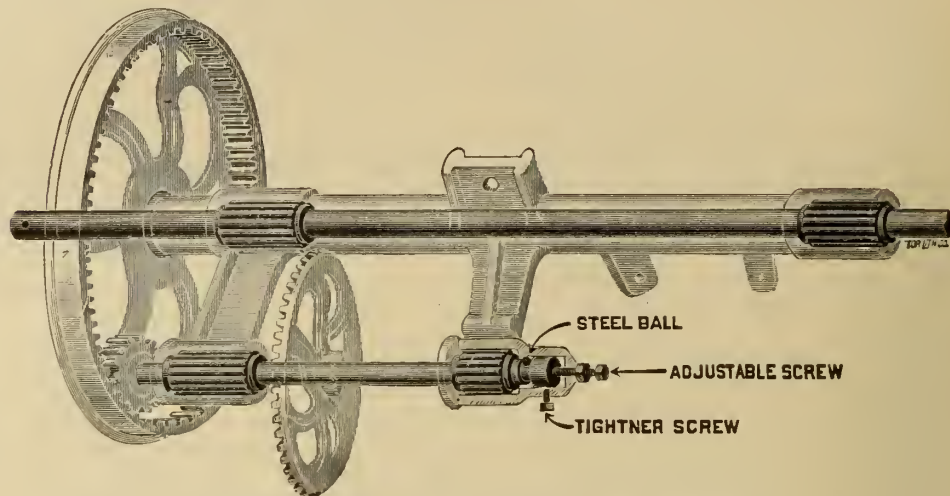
Roller Bearings as Used in Agricultural Machinery
